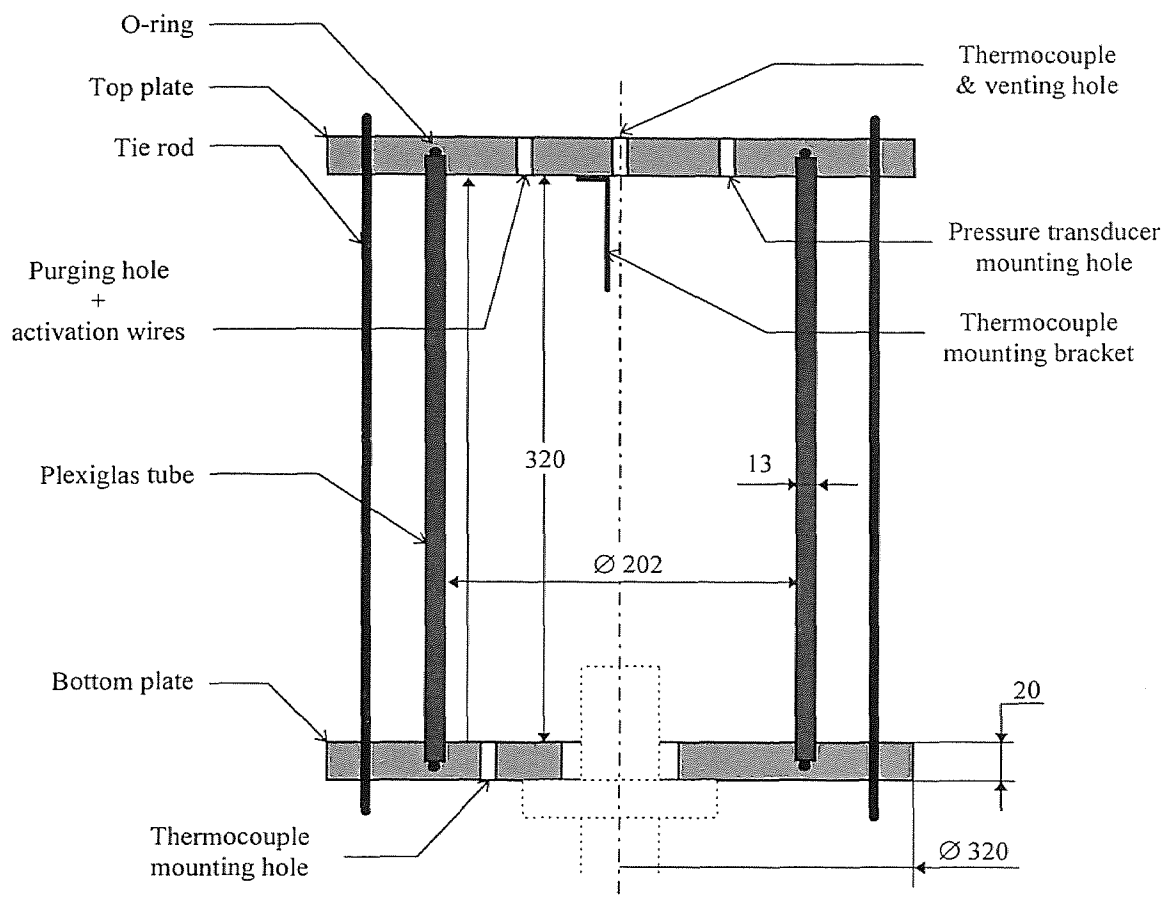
Cross Section of the Receiving Tank [dimensions in mm]
